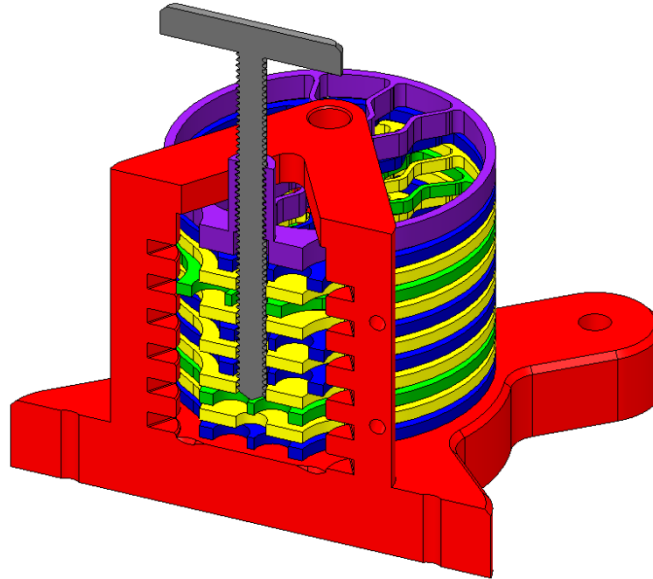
Section view of wedge with threaded rod. The threaded rod has passed through the holes in the top wedges and the last three wedges have yet to receive an input.
